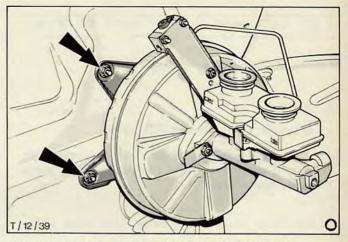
Servo mounting bracket to bulkhead retaining nuts.
